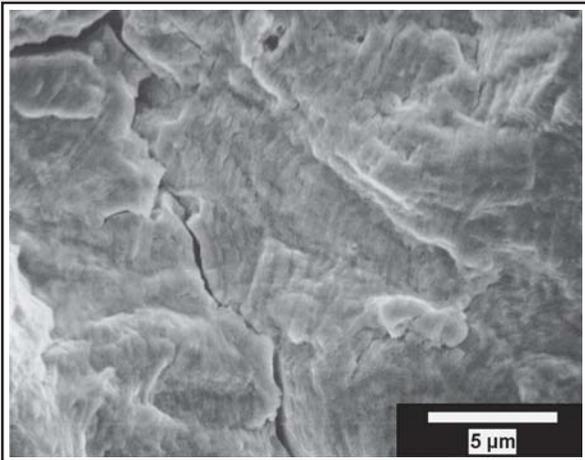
SEM micrograph of fracture surface in bolt B (type 1 bolt)
